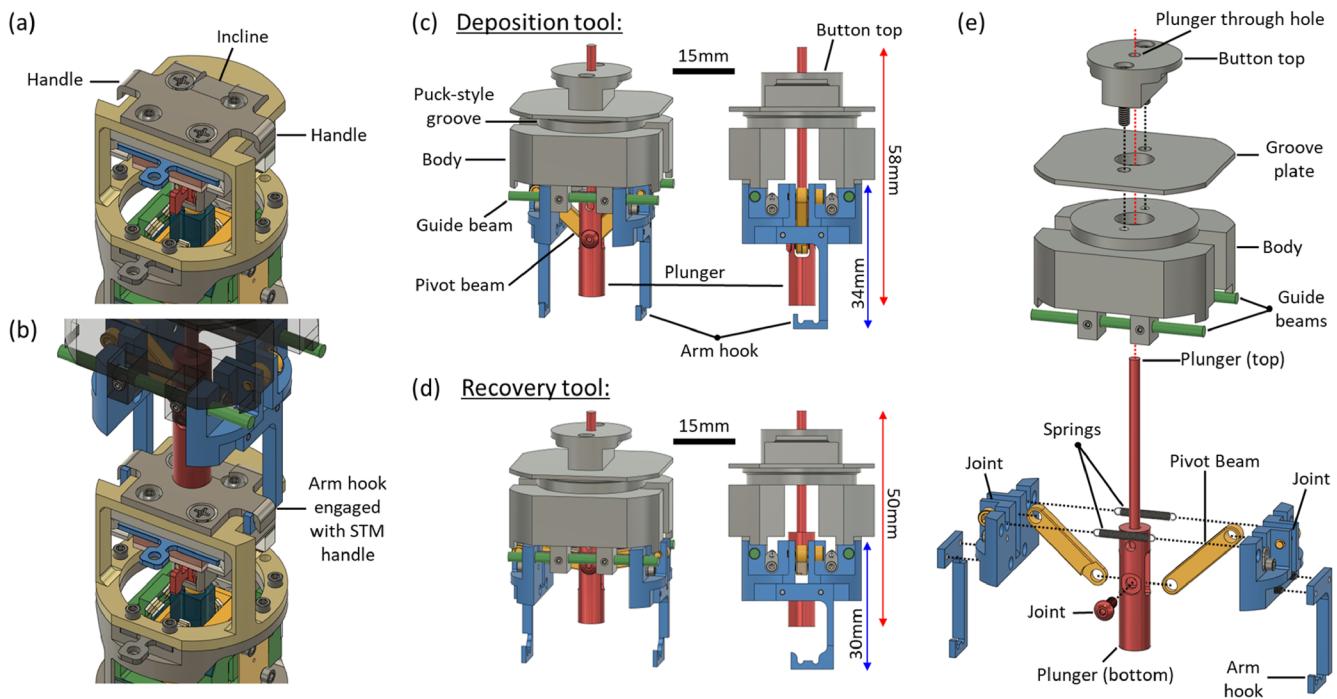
STM head top plate and deposition and recovery tools. (a) STM head top transfer plate for attaching to the tools. (b) Deposition tool arms/hooks engaged with STM head transfer plate handles. Recovery tool attachment is not shown because it is similar to the deposition tool. (c) Deposition tool from a front and side view. The plunger is indicated in red, the hook arms are depicted in blue, and the pivot beams connecting the plunger and arms are in yellow. Guide beams (green) confine the arm movement. (d) Recovery tool from a front and side view. (e) Exploded view of deposition tool. An exploded view of the recovery tool is not shown because it shares many similarities with the deposition tool.
